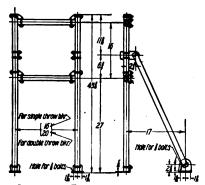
SUPPORTING FRAMEWORK FOR THE TYPES F-11 OF F-22 SINGLE-THROW BREAKER UNIT; PANEL-MOUNTING BREAKER; ANY COVERPLATE; OR TYPE F-11 DOUBLE-THROW BREAKER UNIT
